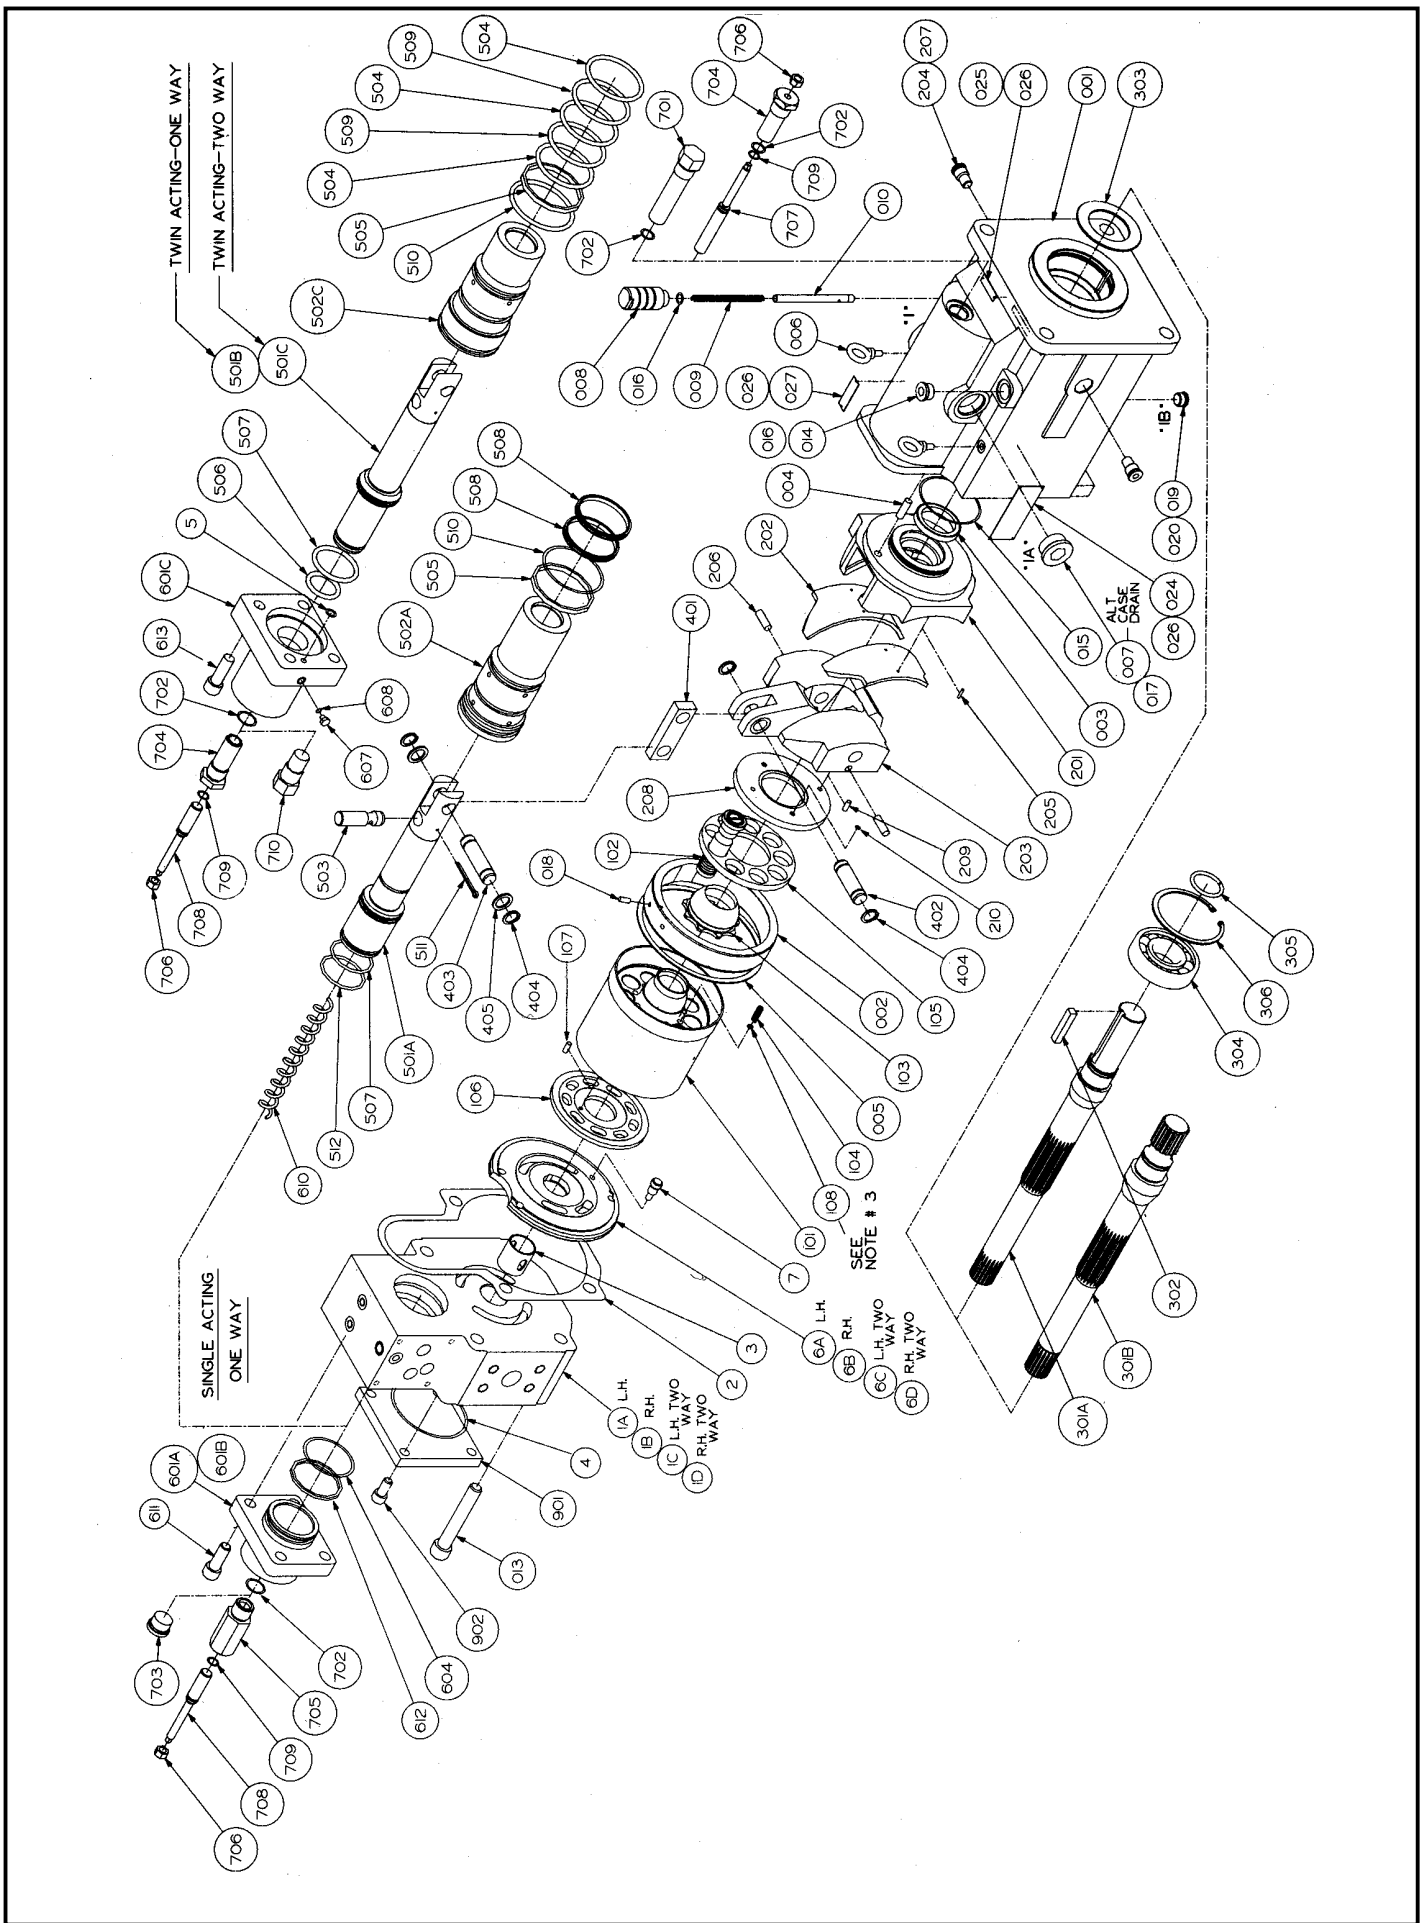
Exploded Parts Drawing, Size 270 and 370 (515915-002).
